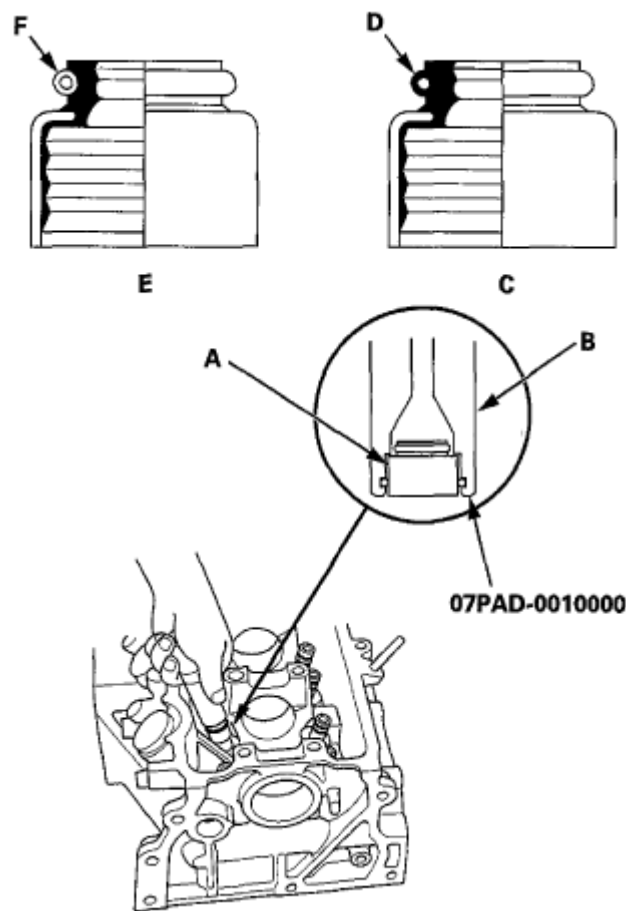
Installing Valve Seals Using 5.5 mm Side Of Stem Seal Driver
